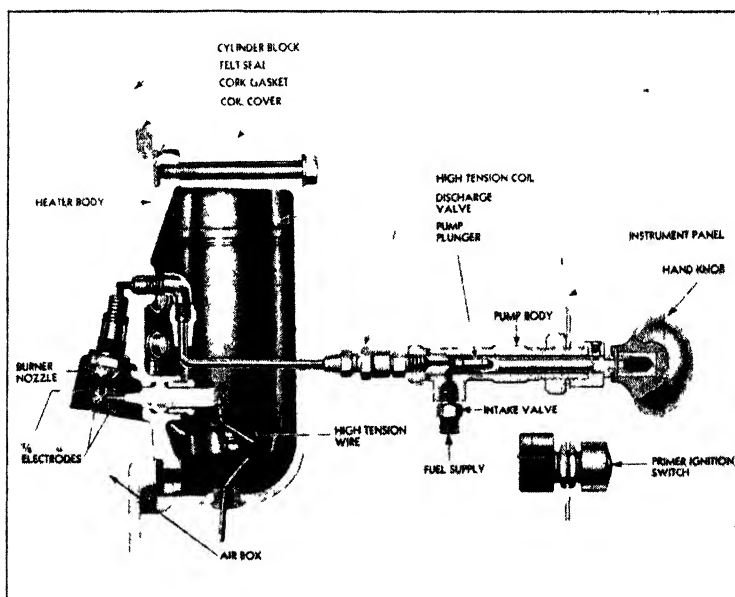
ASSEMBLY DRAWING OF GENERAL MOTORS FLAME PRIMER.
